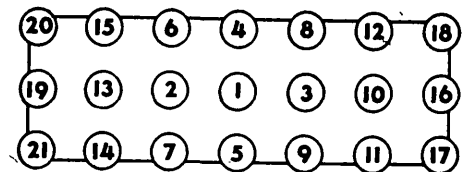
Cylinder head tightening sequence on 1951-52 six-cylinder engine
